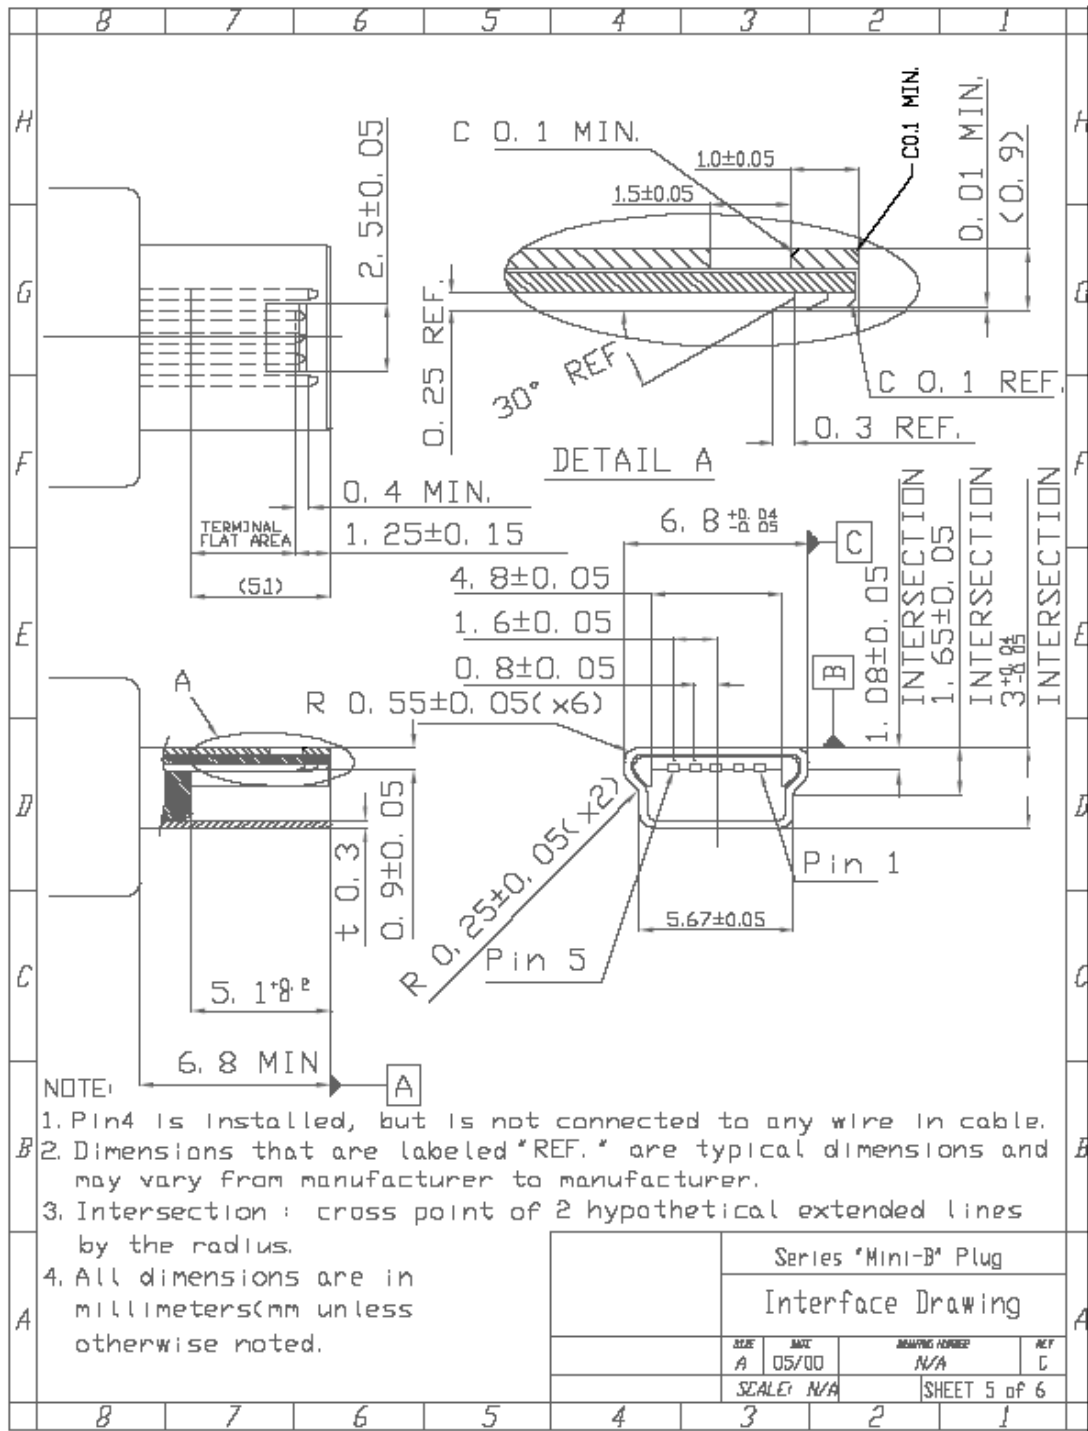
USB Series "Mini-B" Plug Interface Drawing
